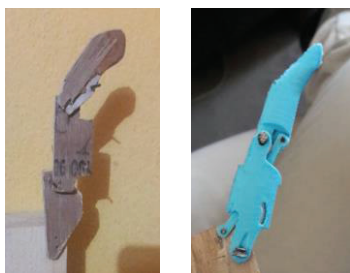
Finger Linkage Mechanism prototype wooden (left) and 3D printed (right)
